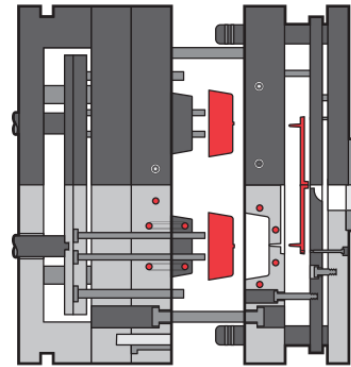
Schematic of a two-cavity, three-plate mold with cutaway view showing final opening phase and stripper plate in forward position.
